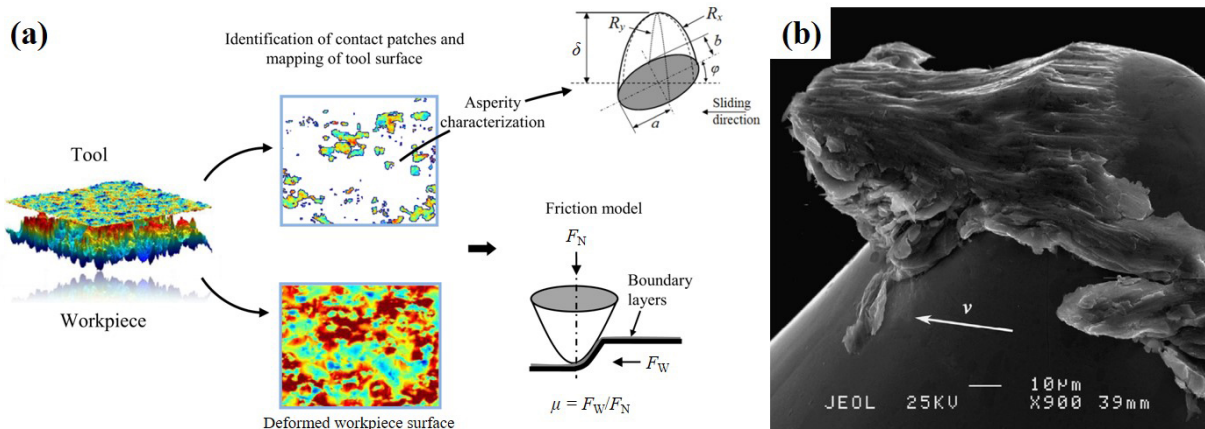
(a) Tool–workpiece contact during deep drawing process; (b) aluminium transfer of tool pin tip. Note: b is the nominal contact width. Reproduced with permission from Ref. [101] for (a), © Elsevier B.V. 2014; Ref. [102] for (b), © Elsevier B.V. 2013.
